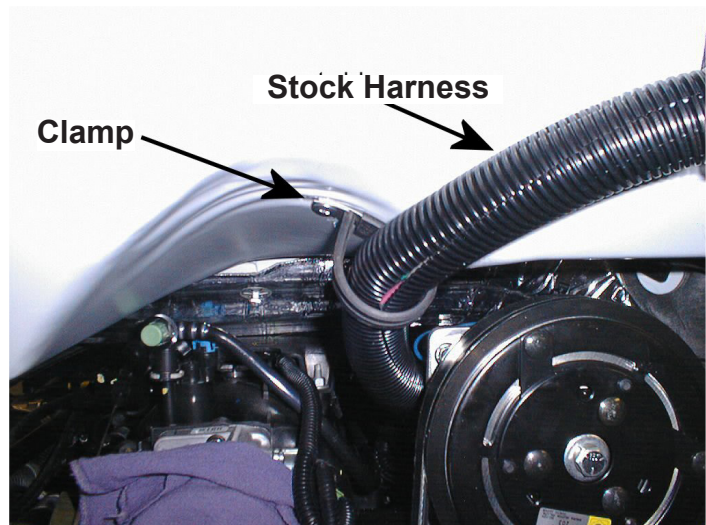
Hold Main Wire Harness Away from CDS Clutch
